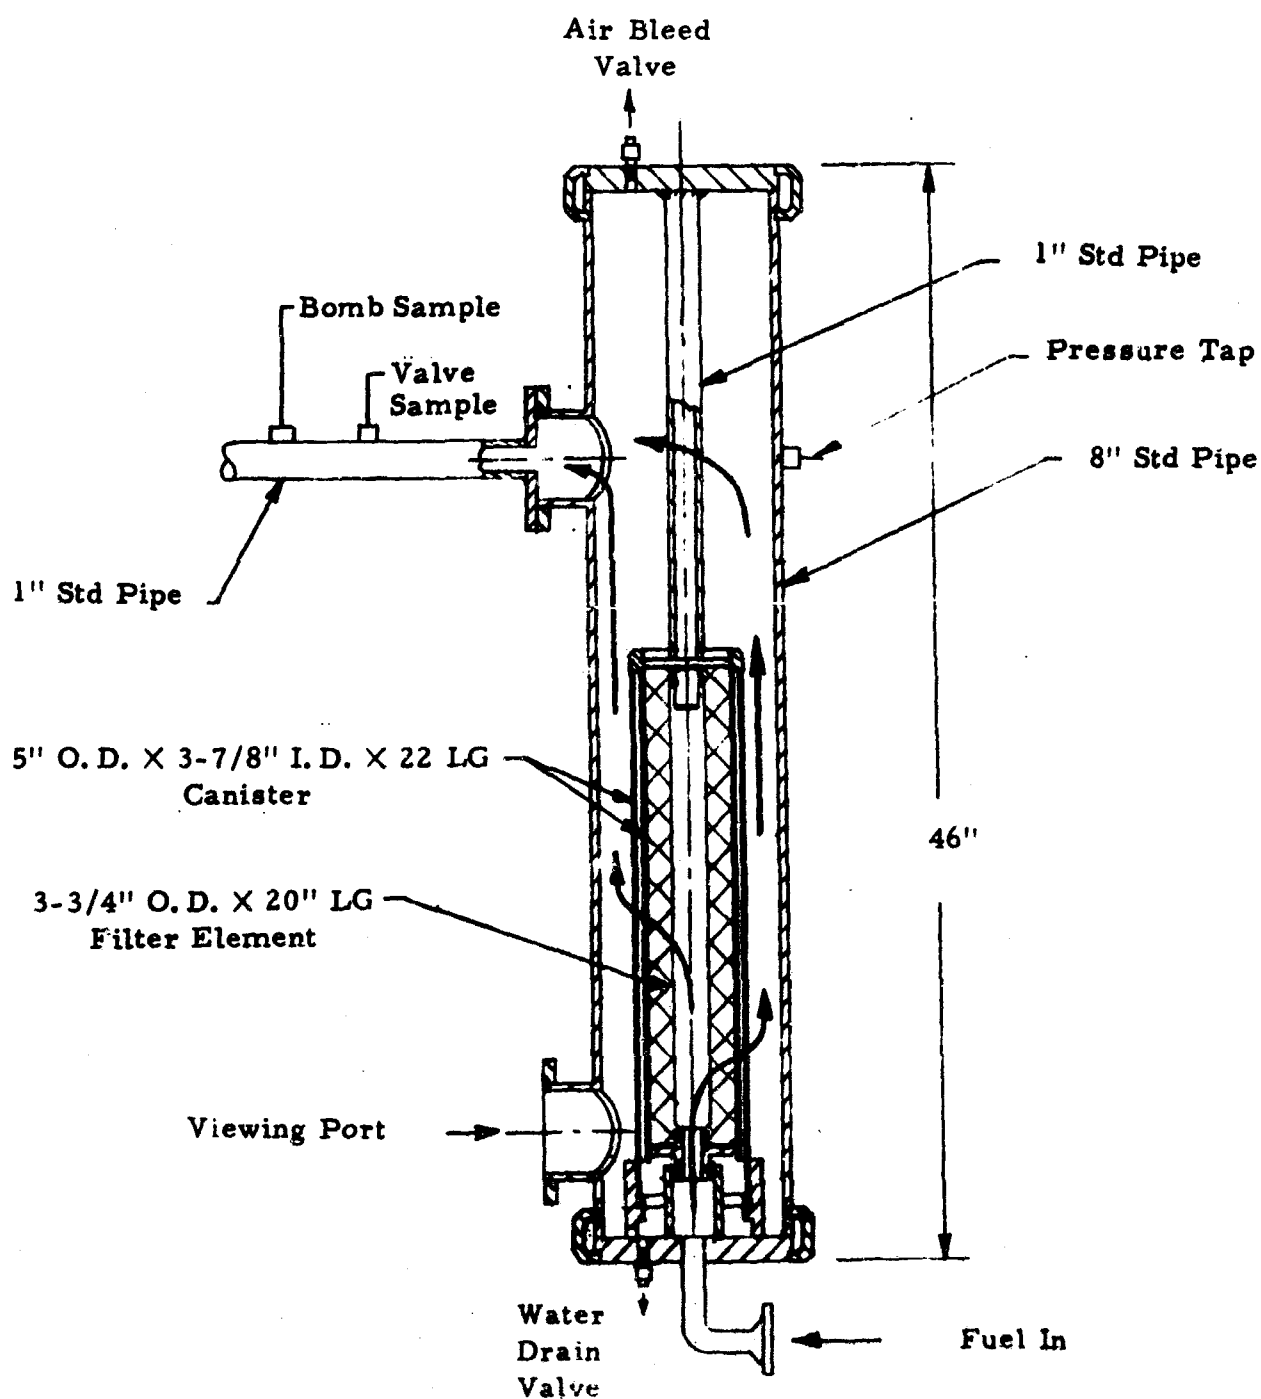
SINGLE ELEMENT TEST HOUSING
